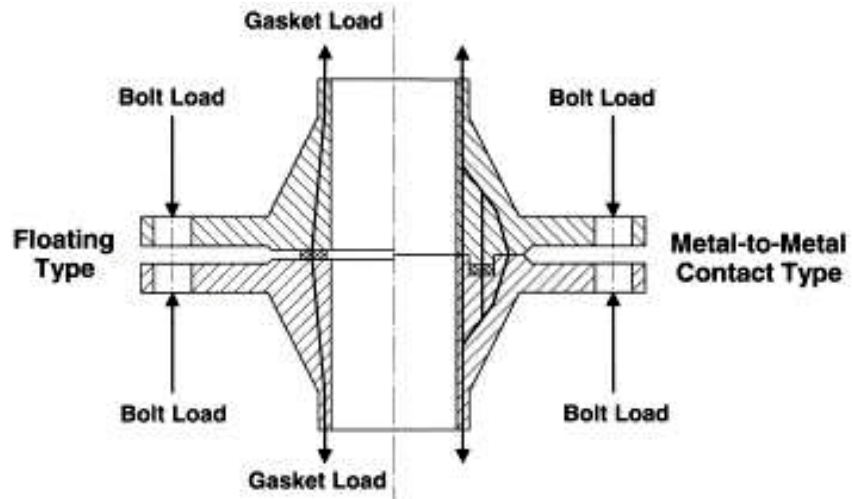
Bolted flange connections (left side) and MMC type (right side) flanged joints
